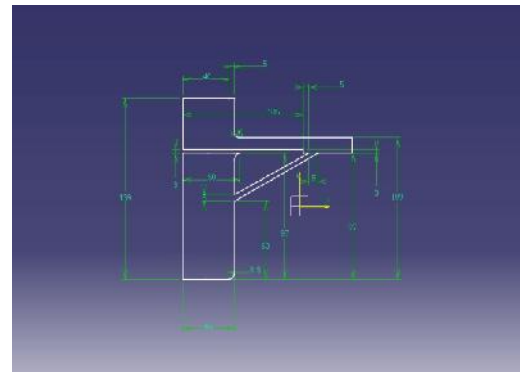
Hydro-Assisted Fluid forming model Dimensions
